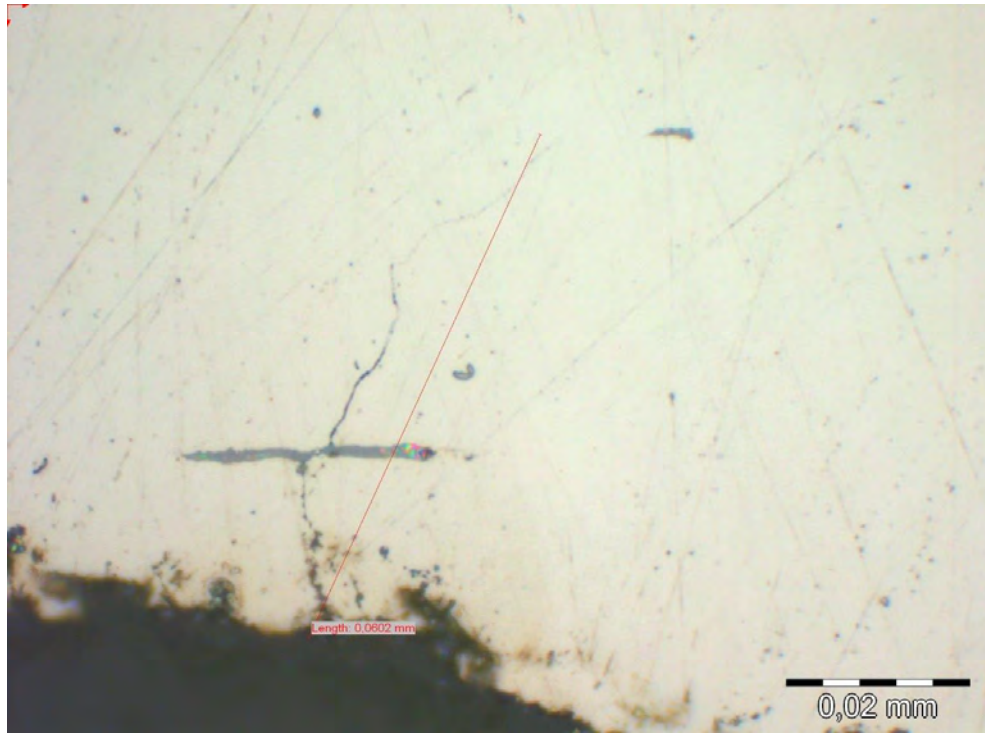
Crack B at segment B, third ridge on barrel no. SFK 0120-A
